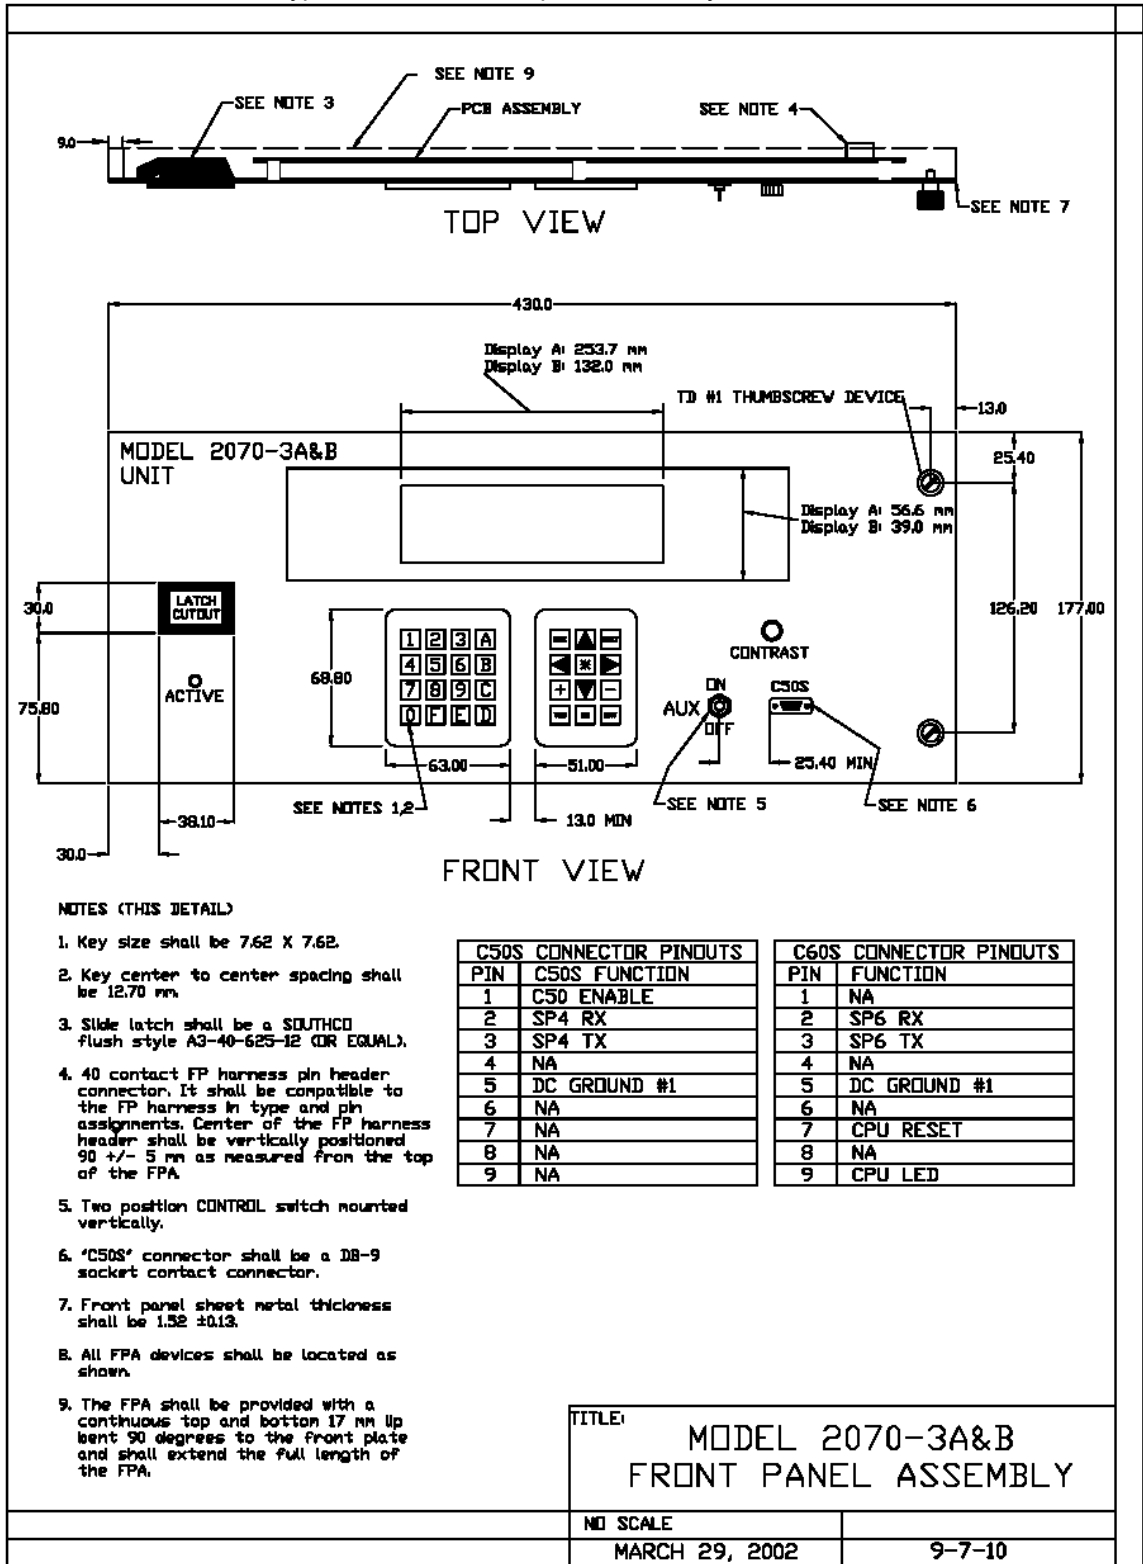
TEES DRAWING 9-7-10, Type 2070-3A&B Front panel Assembly
